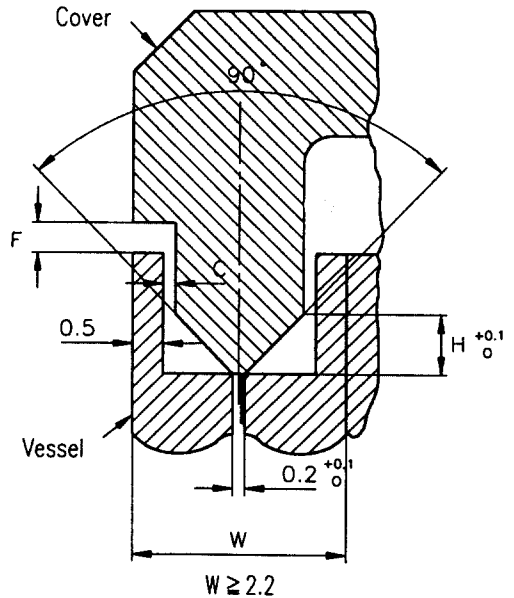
The shape of ultrasonic weld zone (Edge type)
